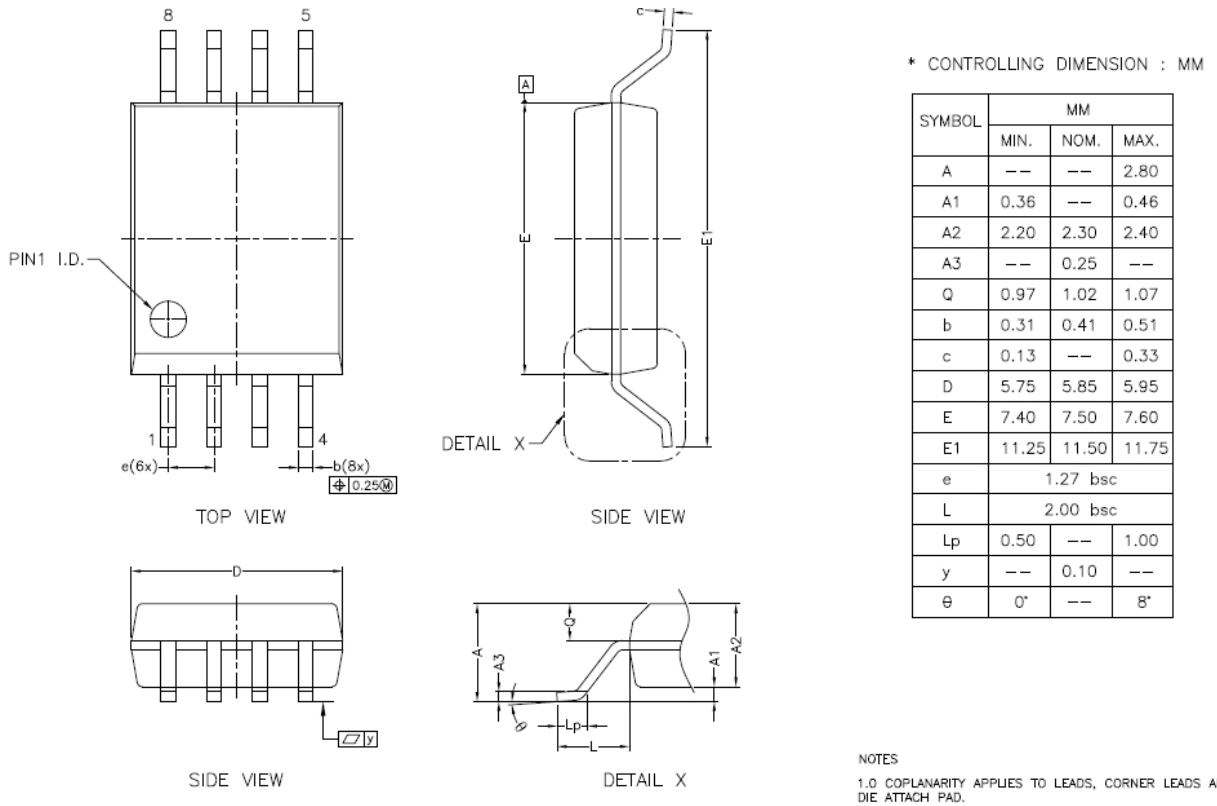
SOP8(300 mil) Package Shape and Dimension in millimeters and (inches)
